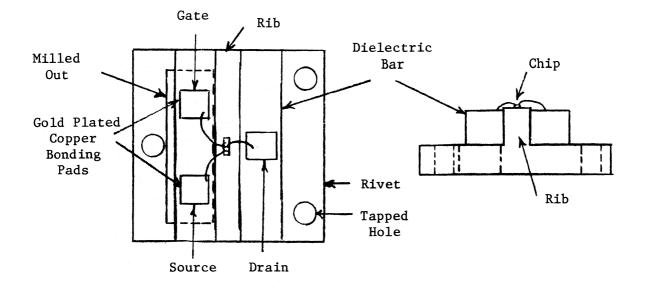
Two views of the chip soldered onto the copper rivet. Also shown are 1-mil wires bonded from the FET to the pads on the dielectric bars.
